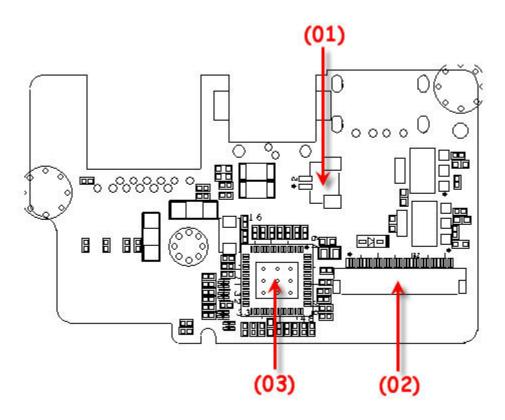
LAN board 10/100 RJ11 layout (Front)
